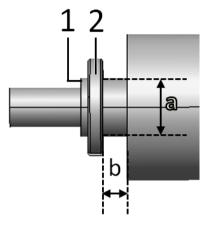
Relevant components and dimensions for installation in the mechanical mounting (schematic)
